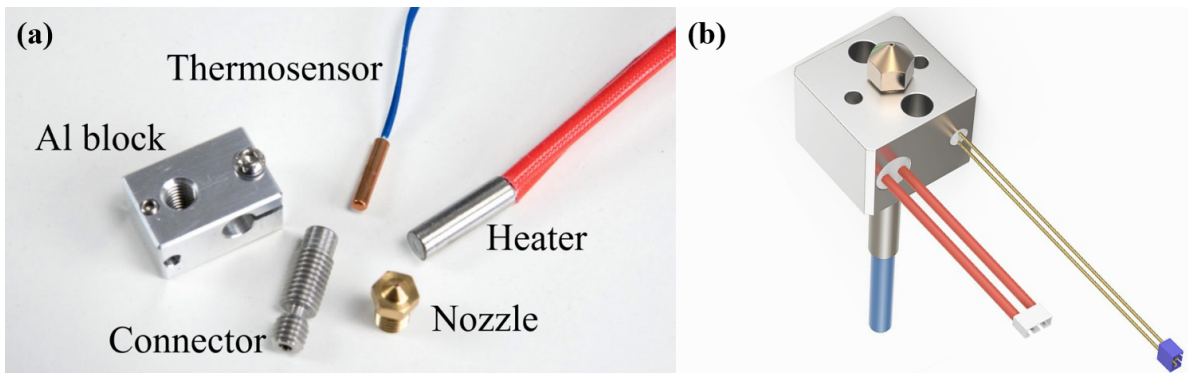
Design of the catcher inspired by 3D printing technology. (a) Disassembled view of the 3D printer hotend components. (b) Schematic showing the assembled hotend used as the heated catcher.
